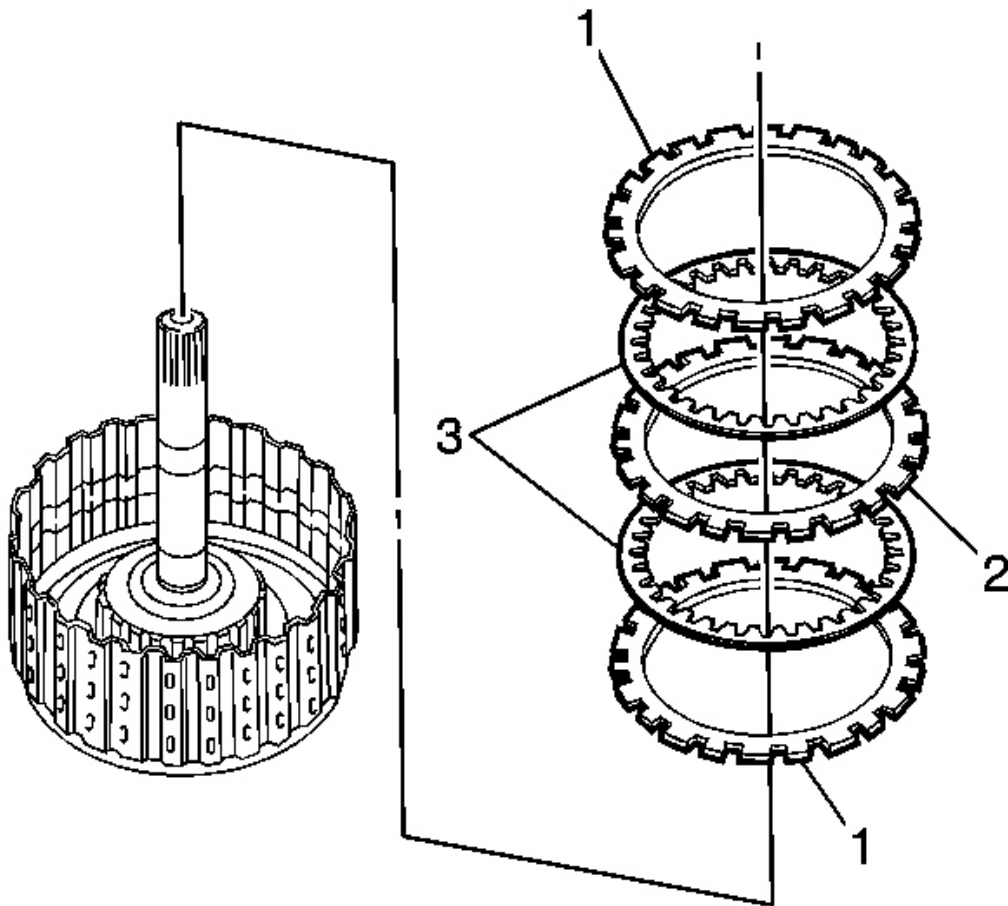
Flanges, Discs, Plate & Reverse Clutch Drum
